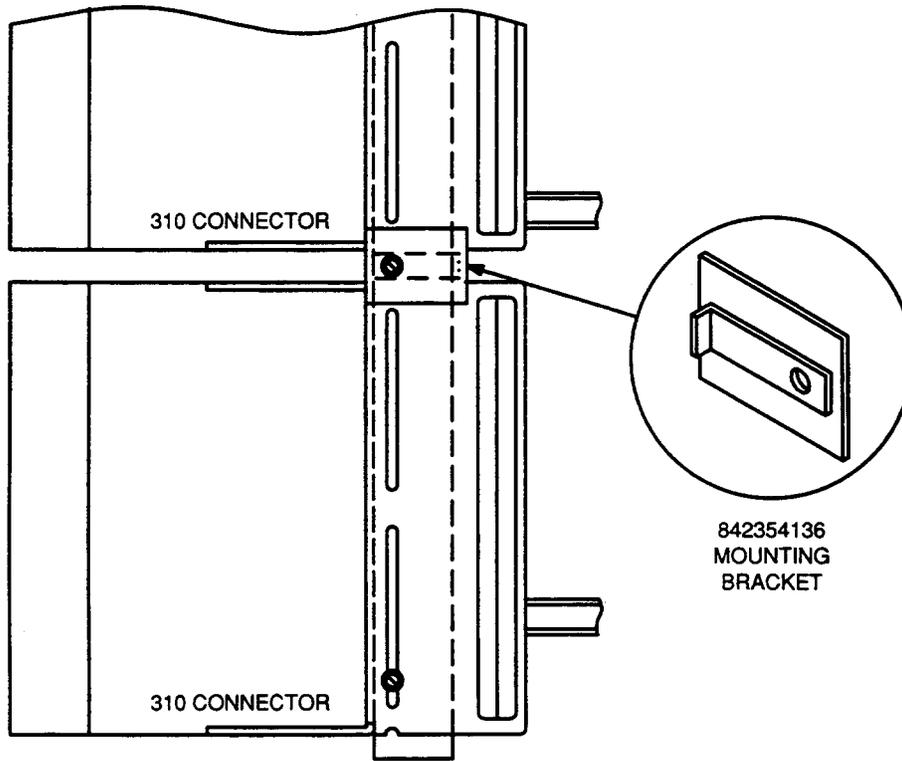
Mounting Arrangement for the 310/310L- or 310M/310ML-Type Connectors Using Existing Mounting Holes
